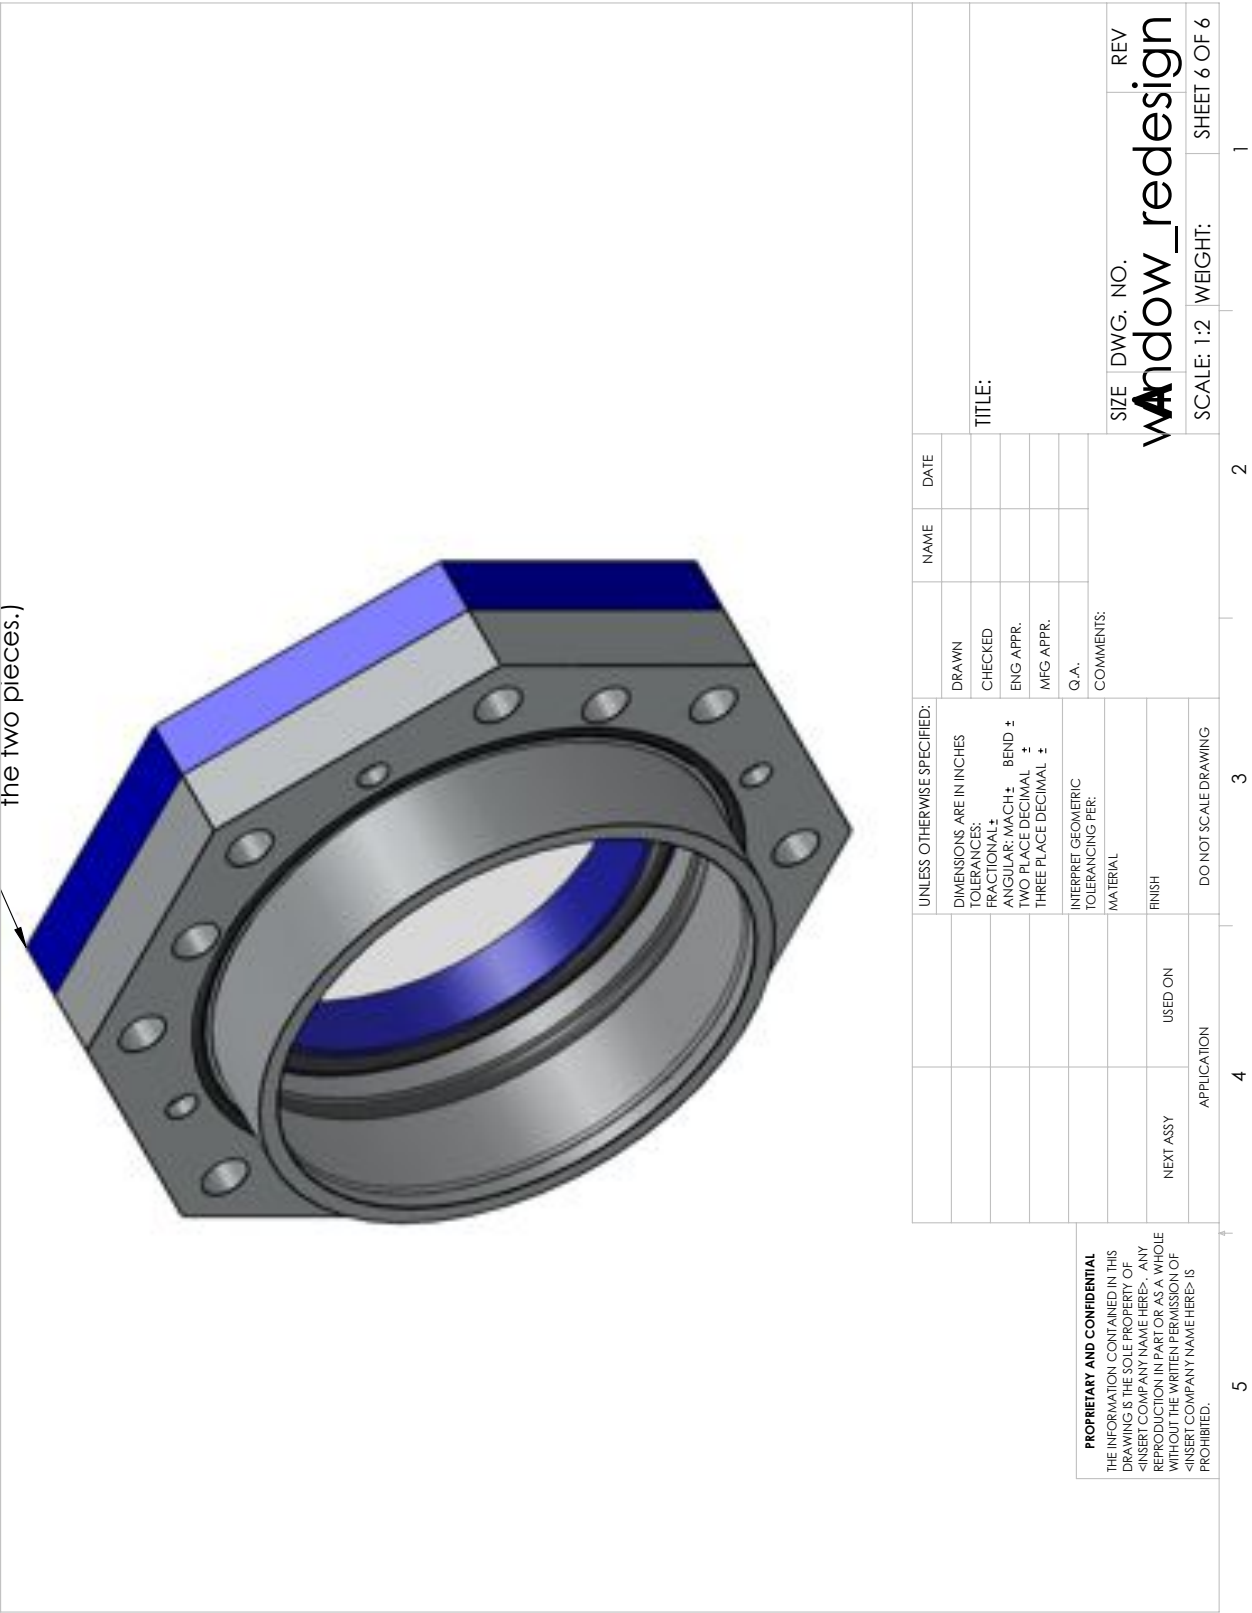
Drawings of the redesigned GDT test section window, part 6.
